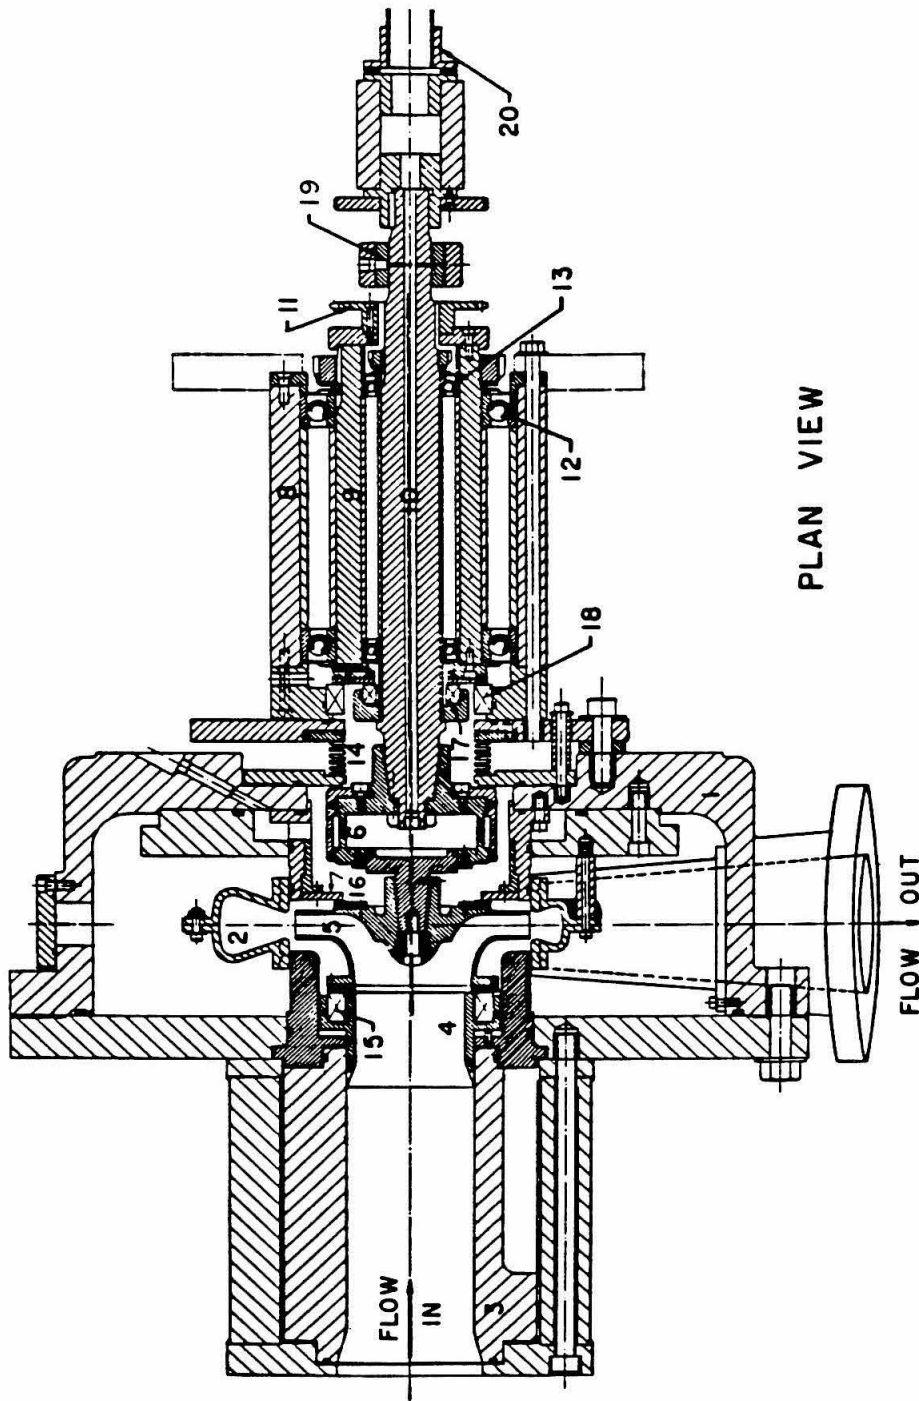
Assembly drawing of the test section and the eccentric drive mechanism. Pump housing, (1); volute (2); inlet connection (3); impeller (4); rotating dynamometer (6); eccentric drive mechanism: outer and inner bearing carriers (8 and 9), main shaft (10), orbiting motion sprocket (11); outer and inner bearing sets (12 and 13); bellows (14); impeller front face seal (15); impeller back seal (16); eccentric drive inner and outer face seals (17 and 18); air bearing stator (19); flexible coupling (20).
